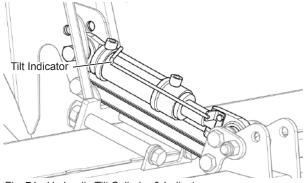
Hydraulic Tilt Cylinder & Indicator
